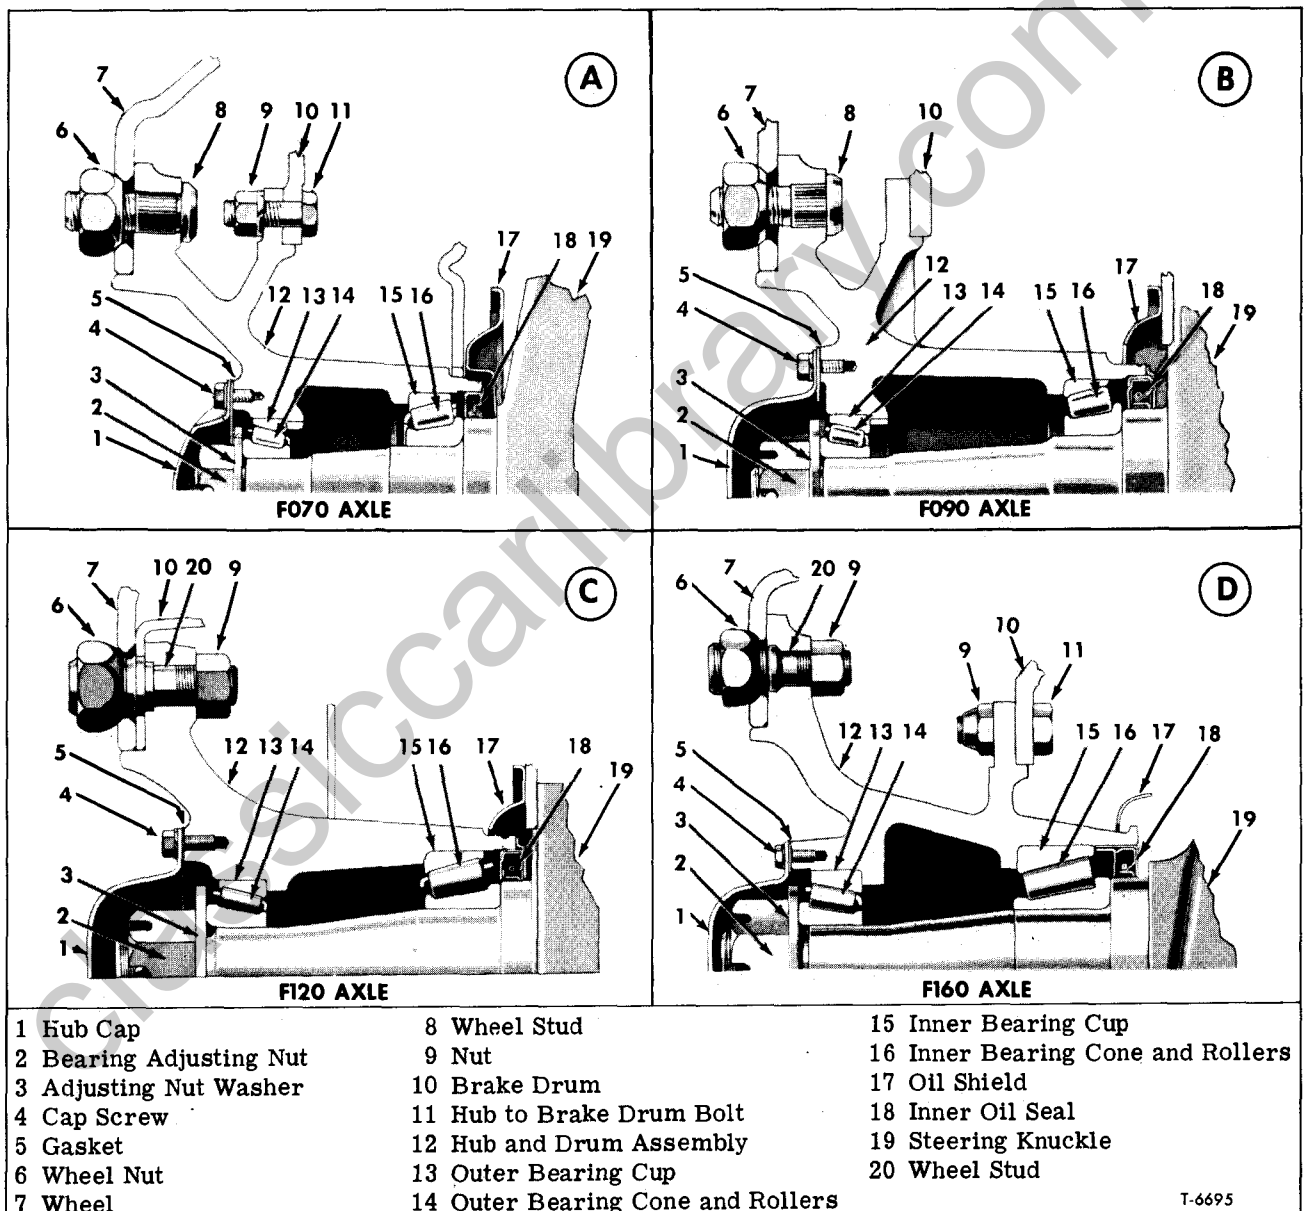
Front Hubs and Bearings (with Disc Type Wheels) (Typical)
